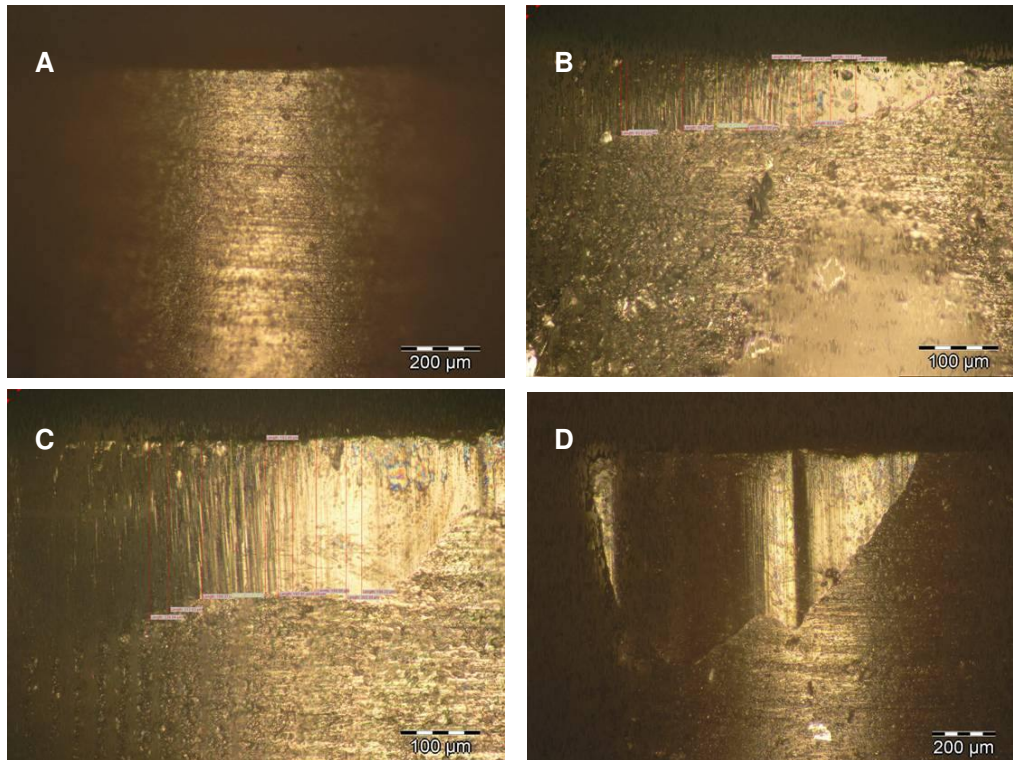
A: The best flank of the tool selected for 100m/min cutting trials. B: after a cutting time of 106.50 seconds, a flank wear scar in excess of 100µm resulted. C: after a cutting time of 213.00 seconds, a flank wear scar in excess of 250µm resulted, D: after 426.00 seconds the flank wear failure criterion (300µm) was exceeded.
